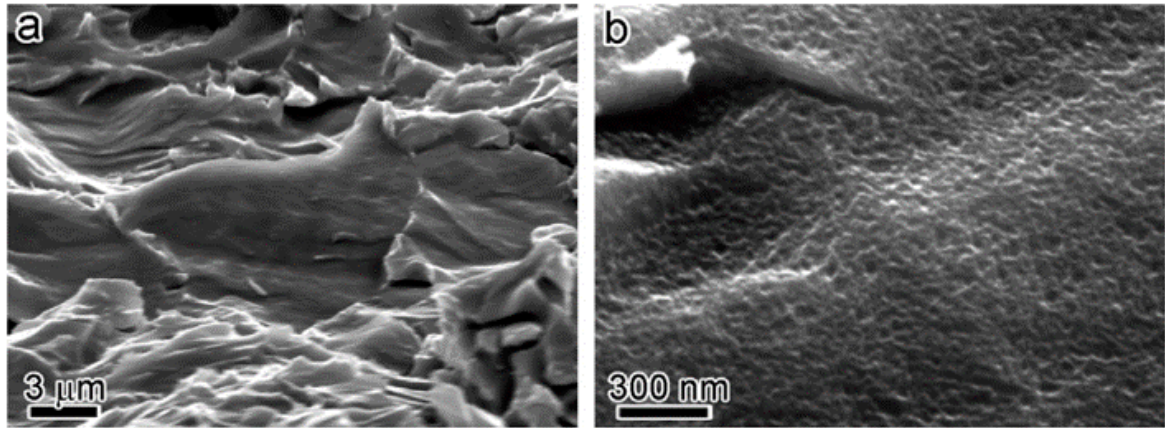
Smooth facets on a quasi-cleavage (QC) fracture surface that are shown to be dimples on a nanoscale. Adapted from [37].
